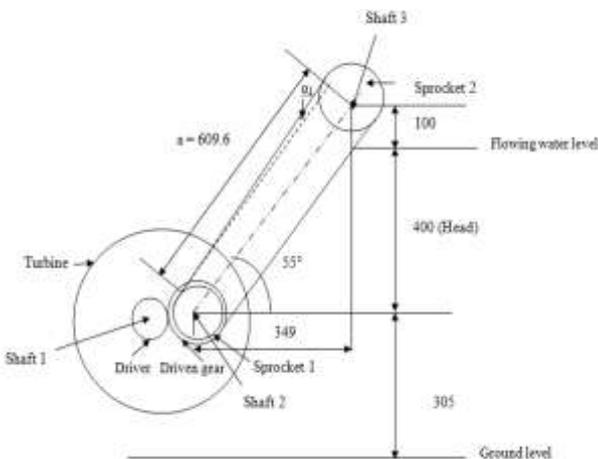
Drive from shaft 1 to shaft 2 to shaft 3
